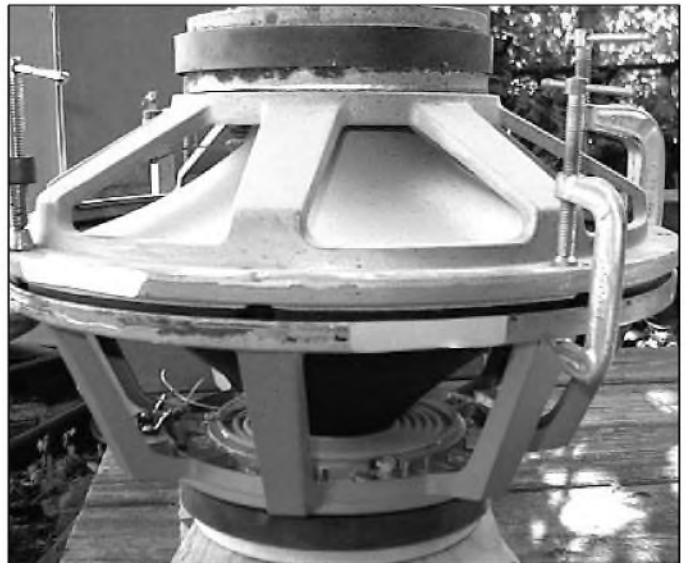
Using a second driver and clamps to put even pressure on gasket.
